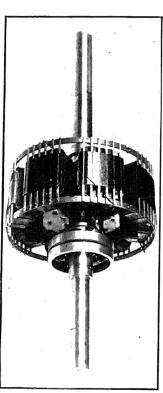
TYPE OF DAMPER CONSTRUCTION [NEWBURY]
